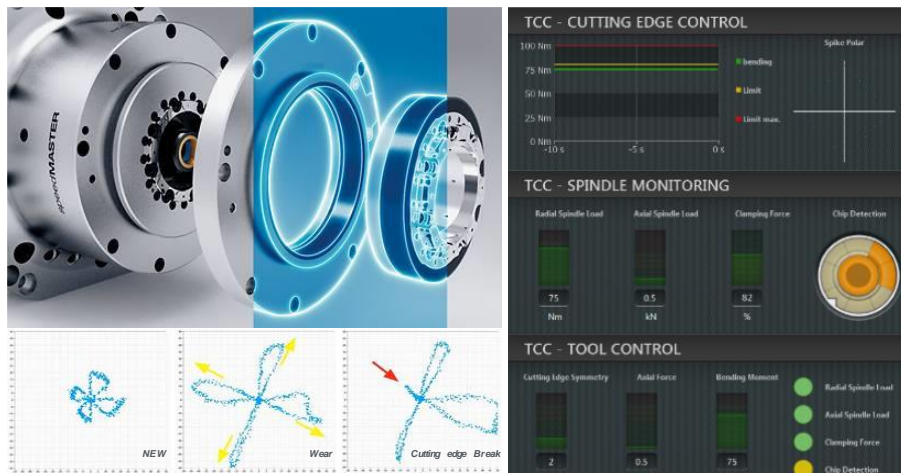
Tool Control Center of DMG MORI¹⁶⁵
